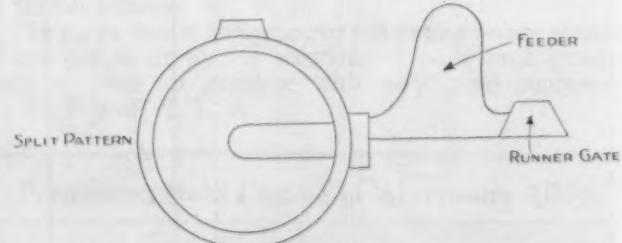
GATING TO AVOID SHRINKAGE CRACKS
